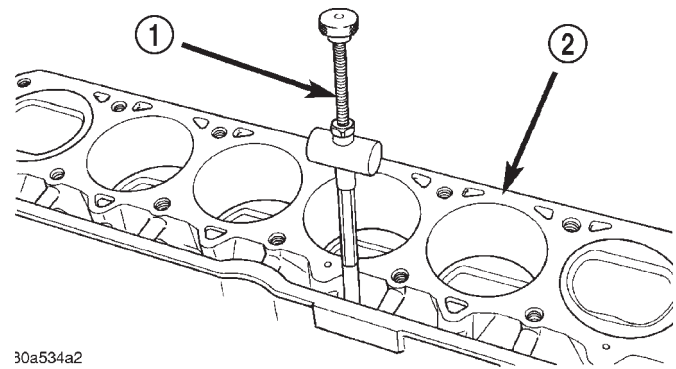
HYDRAULIC VALVE TAPPET REMOVAL - 4.0L
